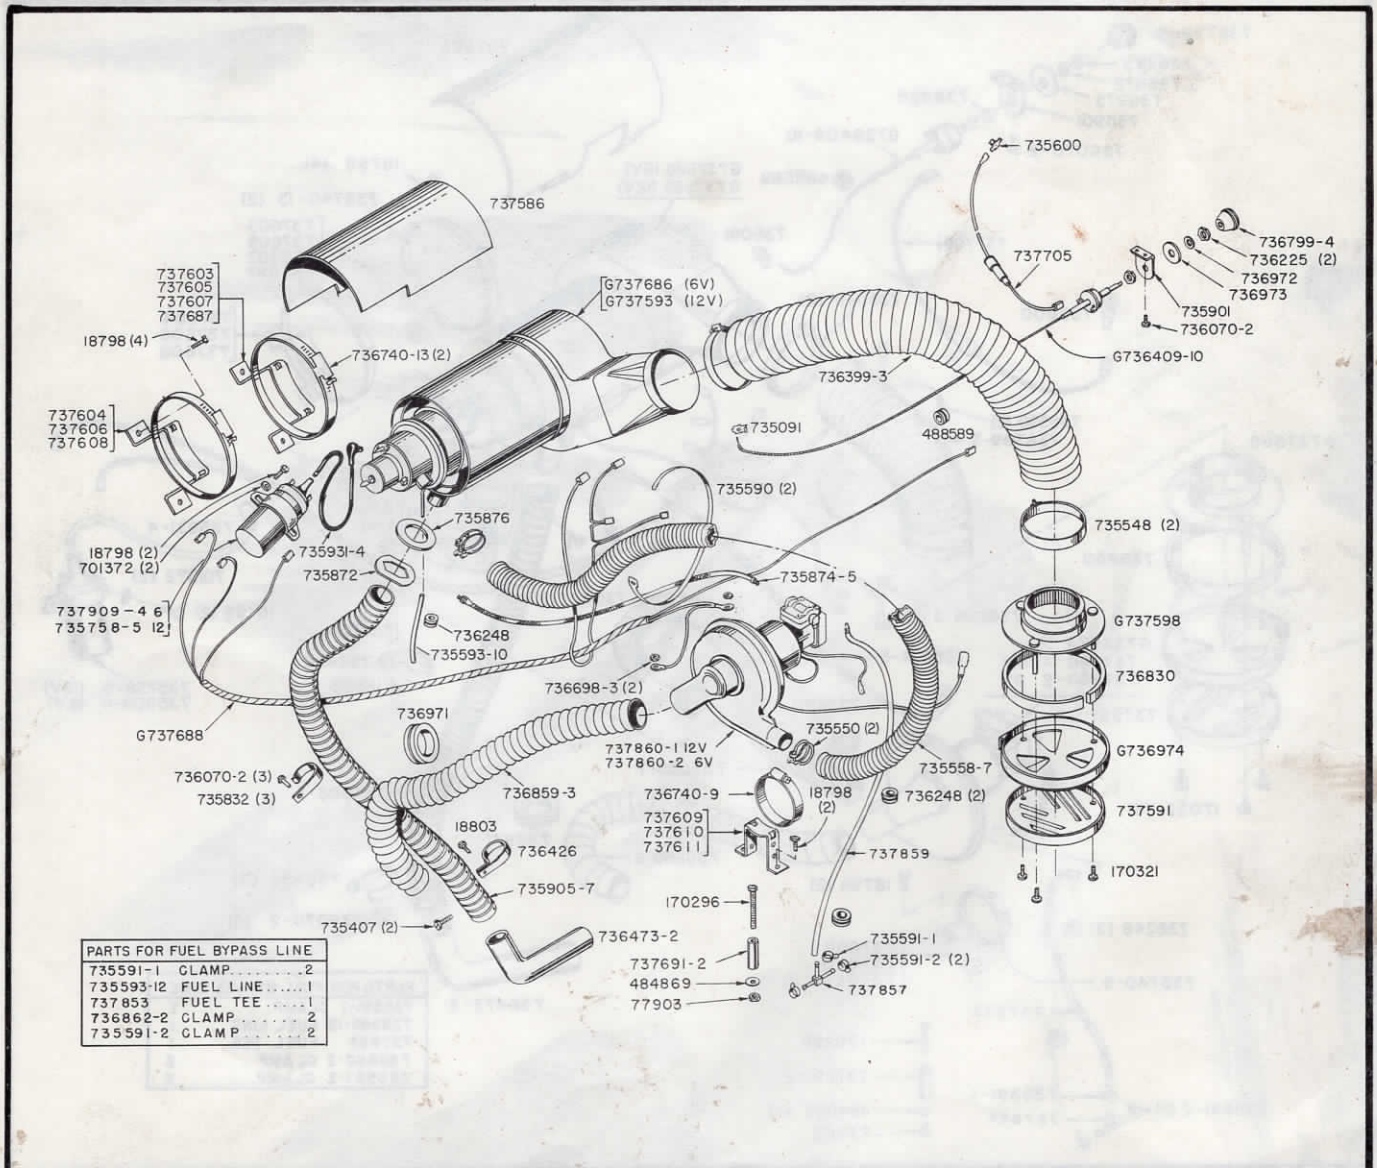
EXPLODED PARTS VIEW -- RIGHT SIDE
